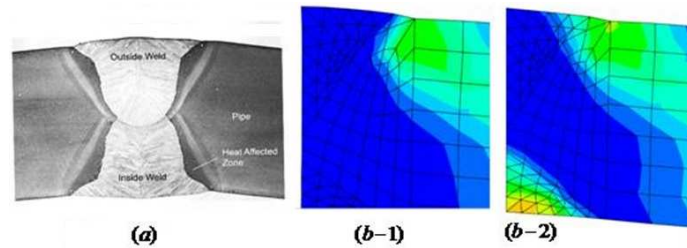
(a) Welding metallography at the top edge of the plate and present numerical simulation of the weld procedure: (b-1) prior the welding and (b-2) after the welding.
